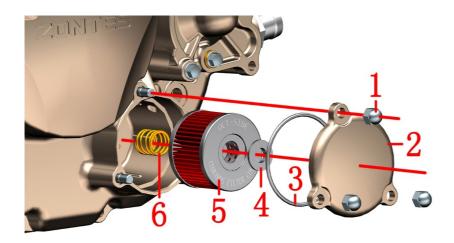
RIGHT CRANKCASE		ZT180MN right crankcase cover assembly-1	CHK	40)
